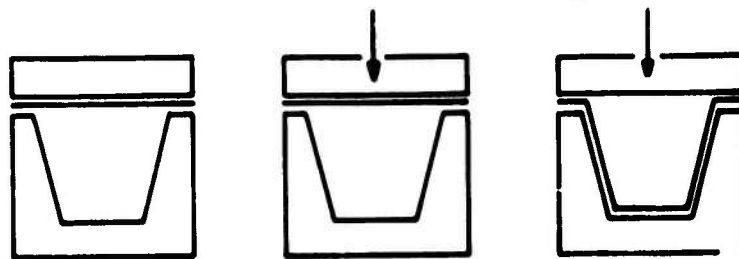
Trapped Sheet, Contact Heat, Pressure Forming
